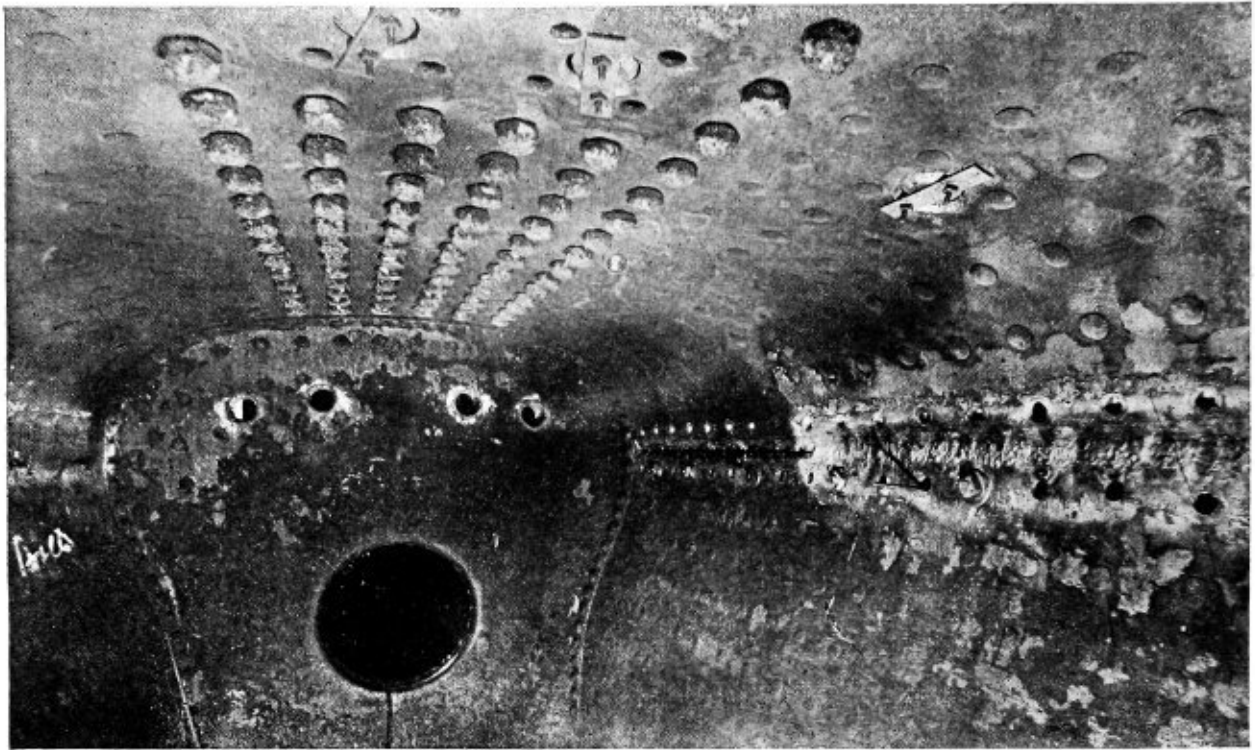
Cracked Side and Crown Sheet Seams Repaired by Welding
